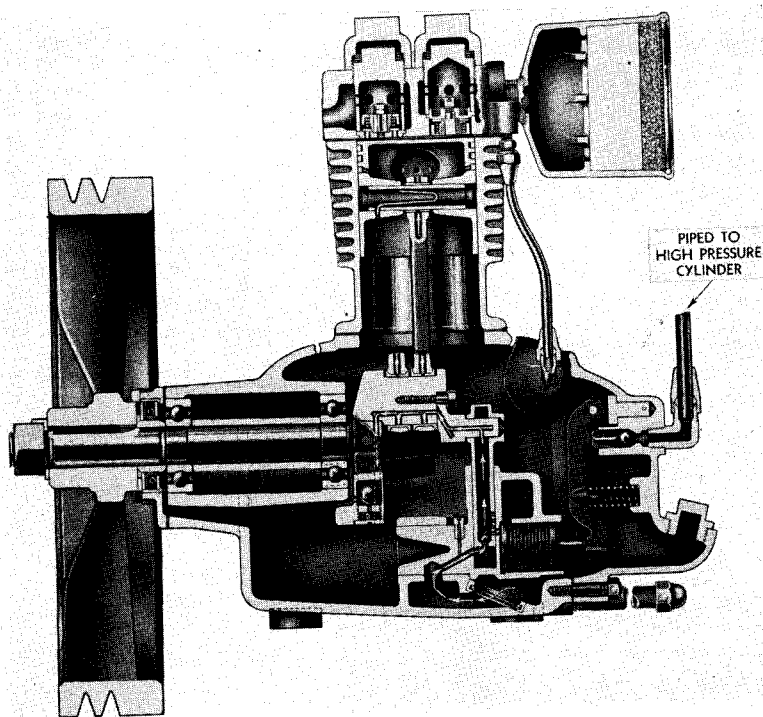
TYPE "Y" AIR COMPRESSOR—SECTION THROUGH CRANKCASE AND LOW PRESSURE CYLINDER
